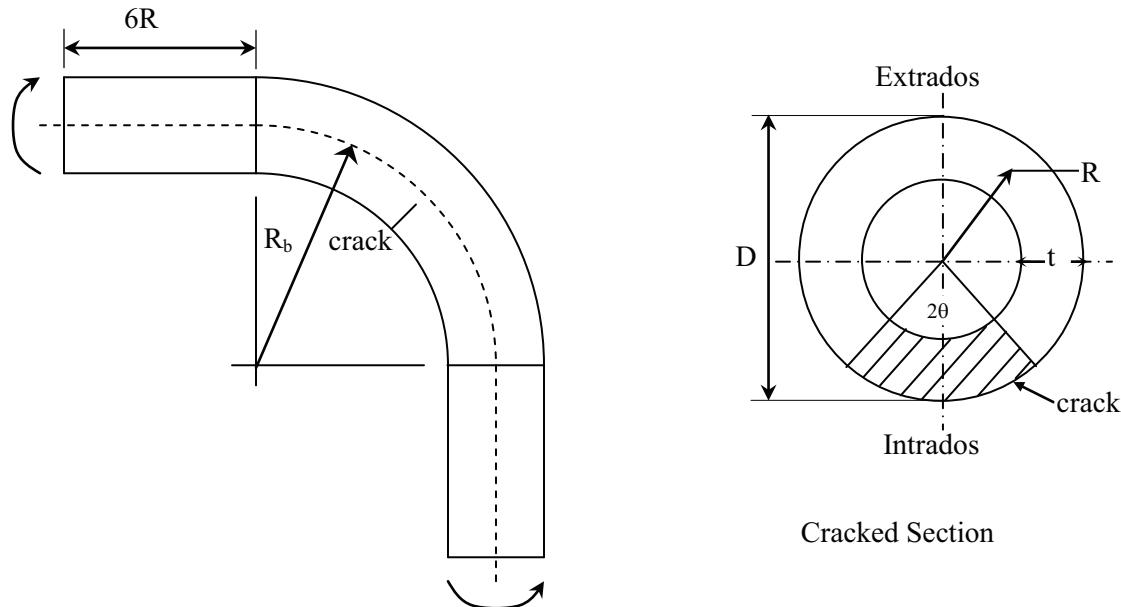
Geometry of elbow with a through wall circumferential crack at intrados under opening moment
